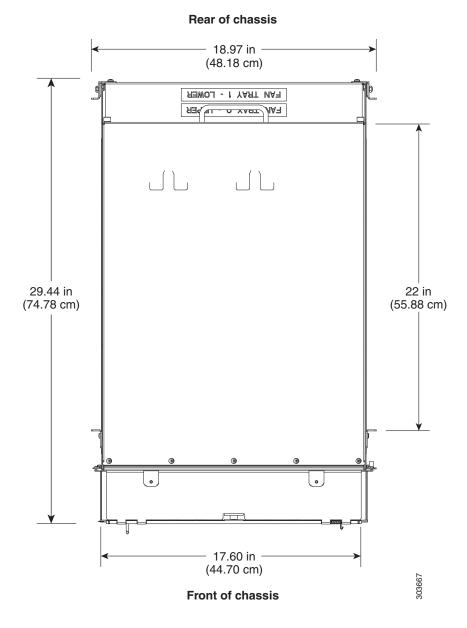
Cisco ASR 9912 Router Chassis Footprint and Dimensions—Top-Down View
